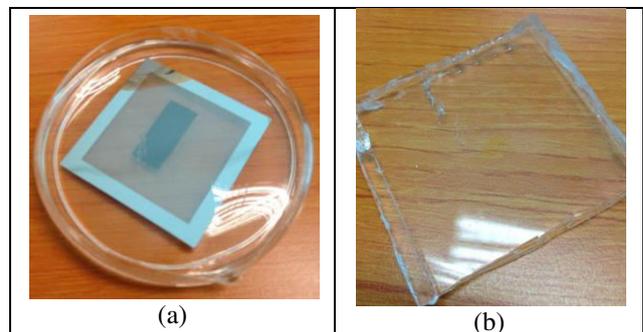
PDMS printing plate with multiple solid lines array casted by 3D printer master mould.
